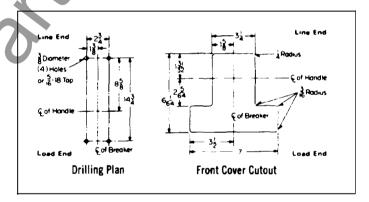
Drilling Plans for Mounting Bolts (Front Connected Terminals) and Front Cover Cutout
